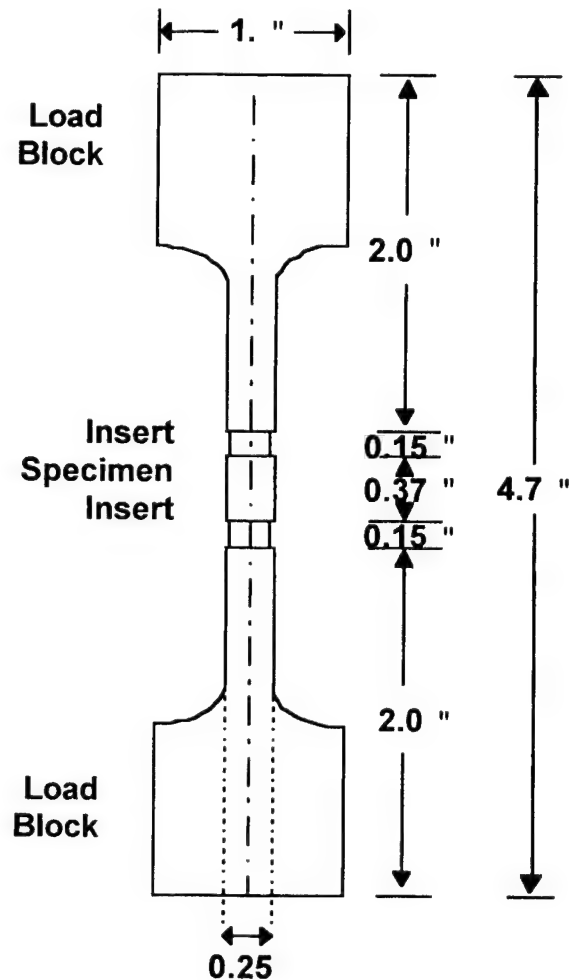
The specimen, insert and load block dimensions and position in the load train.
